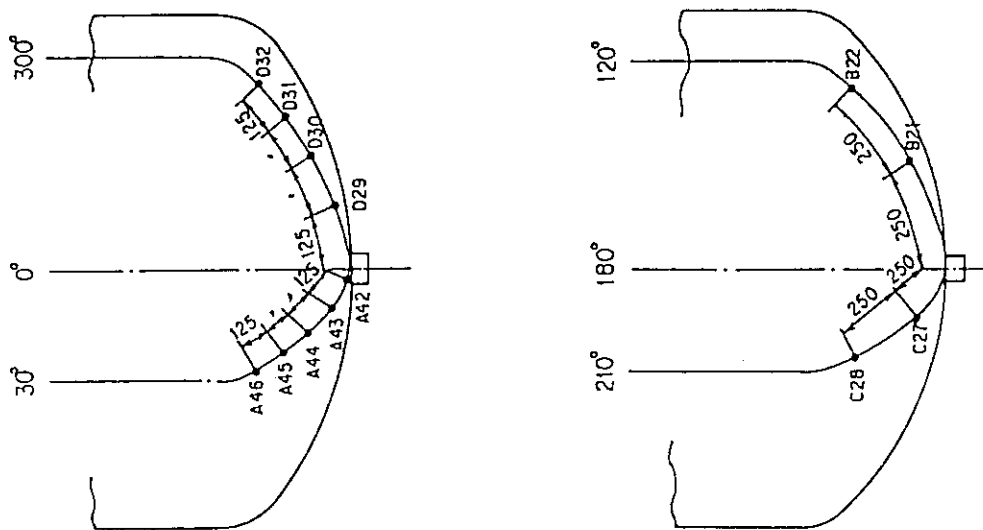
Thermocouple positions on the outer surface of the pressure vessel-lower head
